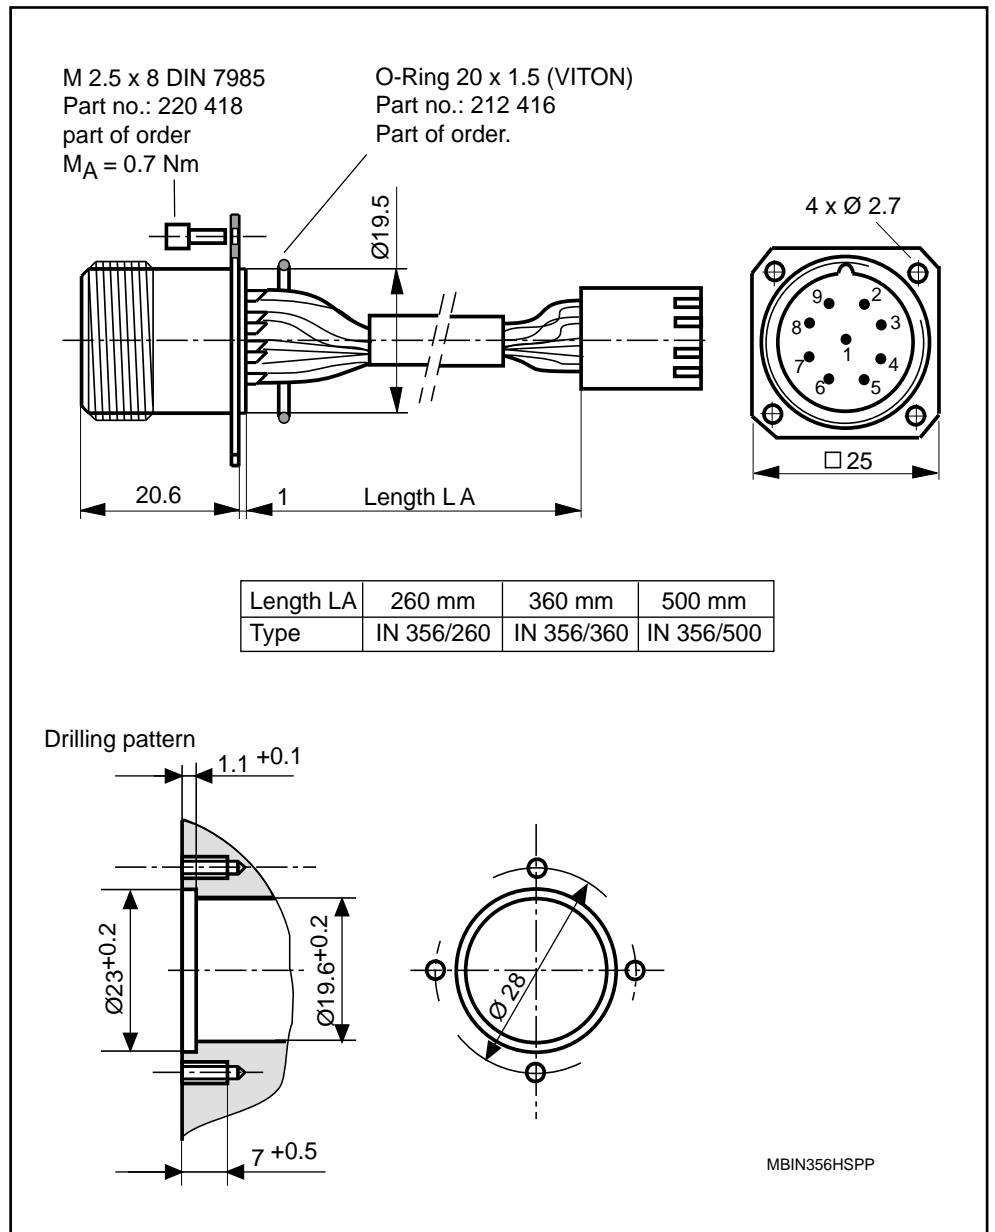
Dimensions of sensor connecting cable IN356/...
